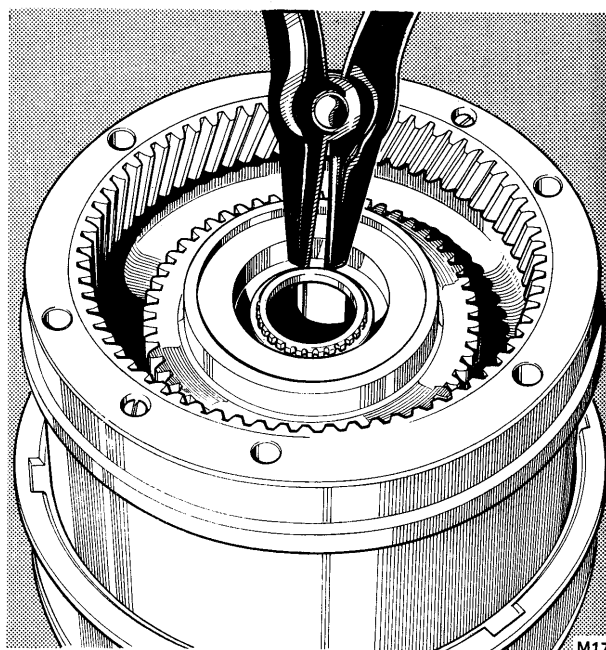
REMOVING THE REAR DRUM RETAINING RING
